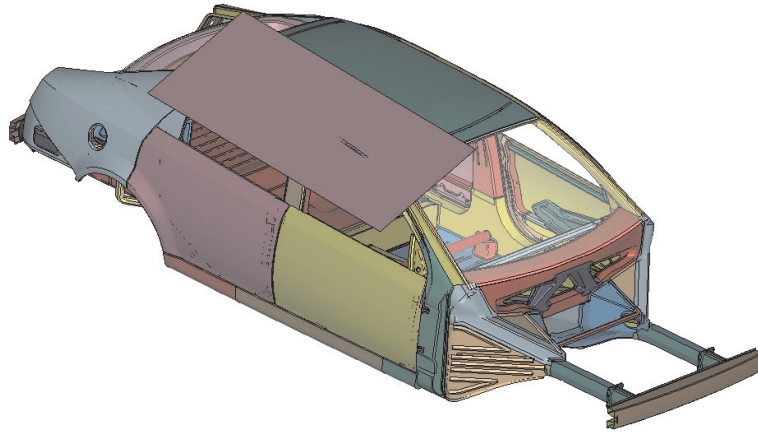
PNGV-Class Roof Crush/Rollover loading arrangement
